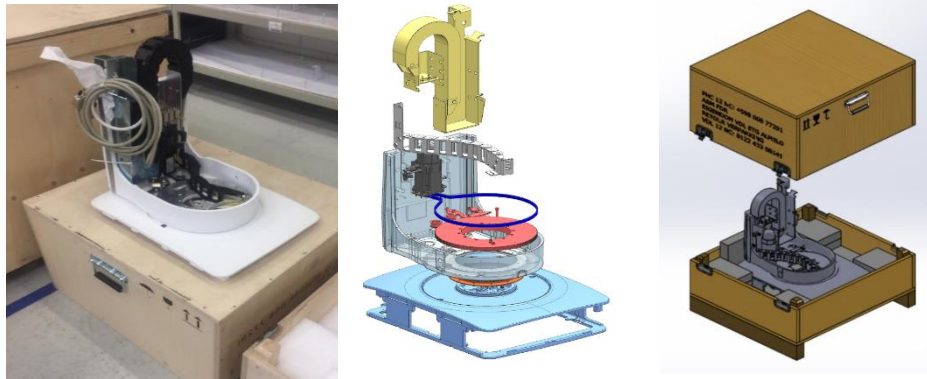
FDR: Picture (Left), Exploded View (Middle), On Dedicated Pallet (Right)
